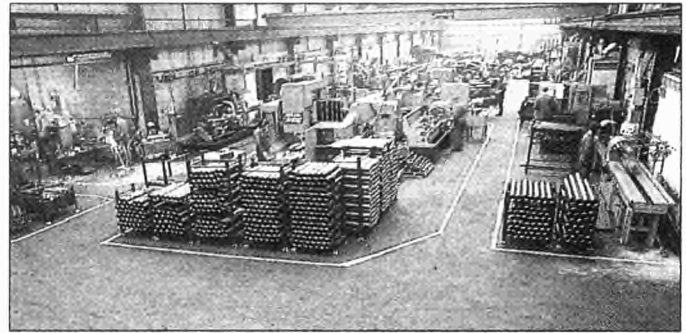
The machining section of Burnside Engineering's factory showing twin production lines.
